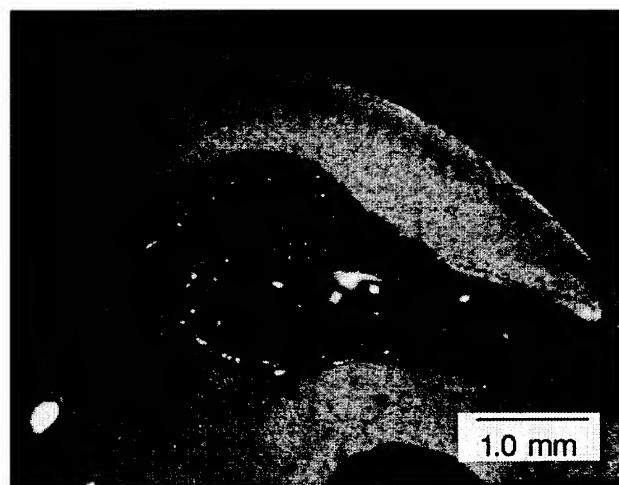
The solder joint fabricated with a soldering iron hold time of 6 s, showing complete dewetting by the solder.
